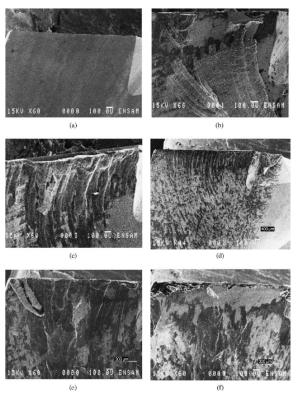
SEM observations of the aluminium adhesion on the surface of the optimised carbide drill. The cutting conditions are: V = 60 m/min; f = 0.16 m/min; (a) new drill, (b) after 1 hole, (c) after 10 holes, (d) after 48 holes, (e) after 96 holes, (f) after 200 holes. [30]
